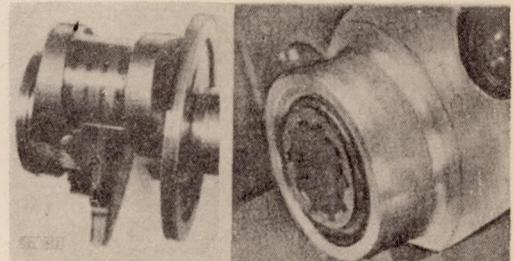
Worn places on case-hardened crankshaft for roller bearing.
